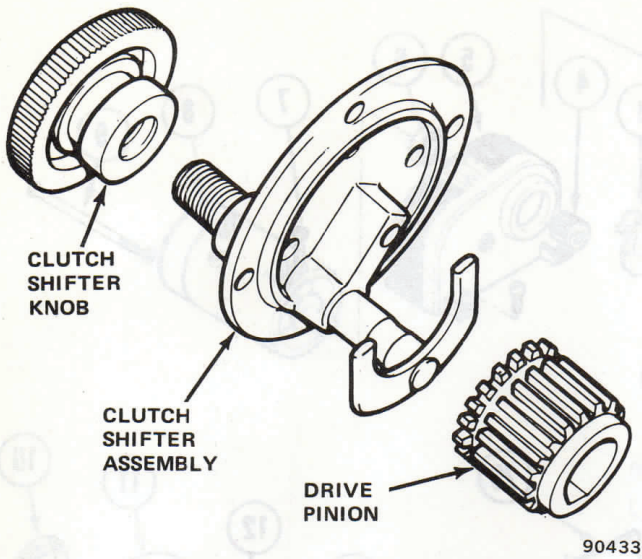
Clutch Shifter Assembly and Winch Motor Drive Pinion
